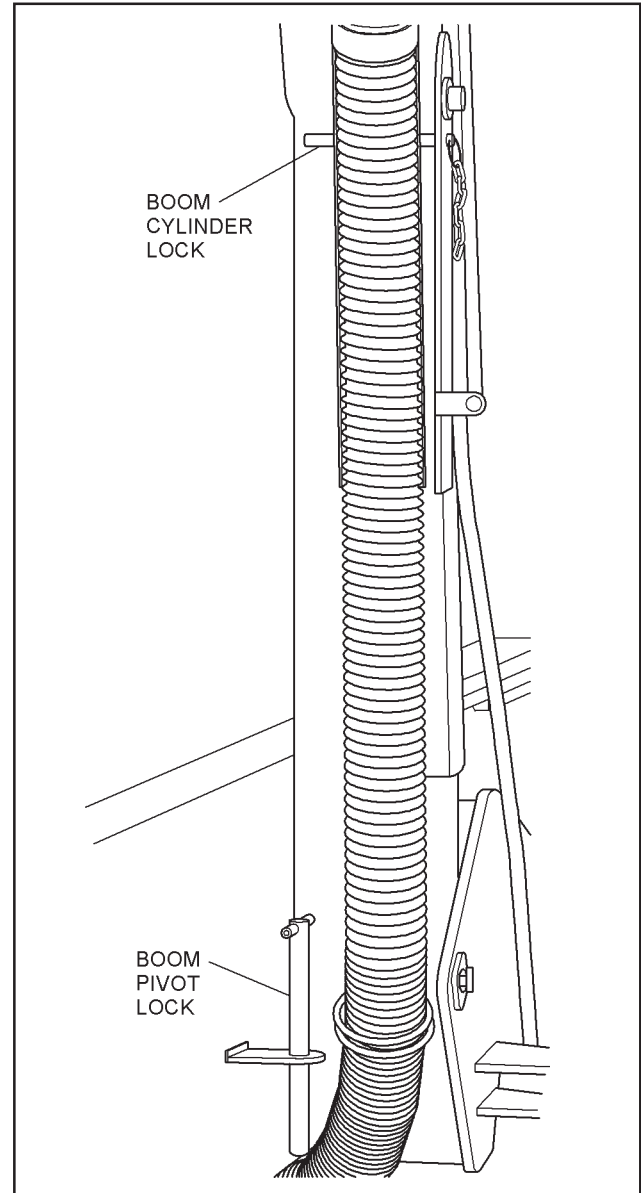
BOOM TRAVEL LOCK PINS
